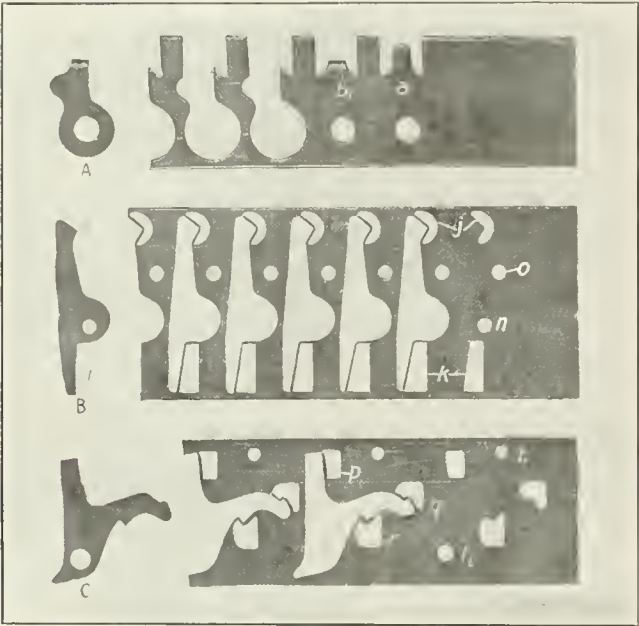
Blanked Parts and Scrap, showing Successive Operations
